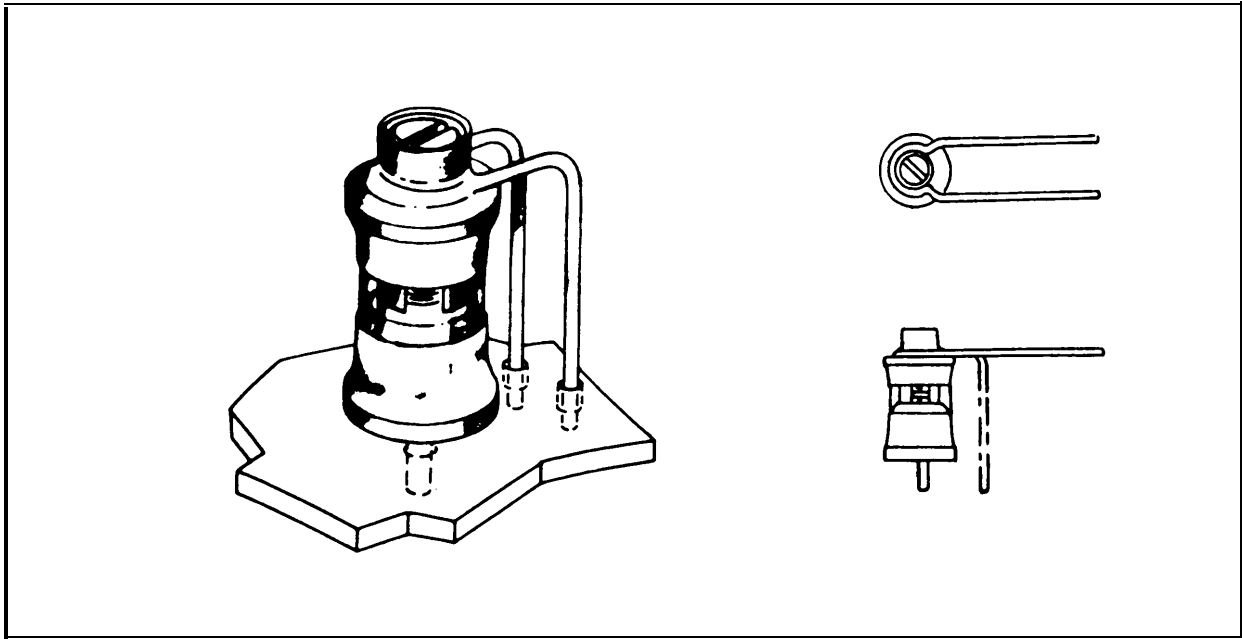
Vertically Mounted Printed Circuit Board Sealed Style (sealed)
